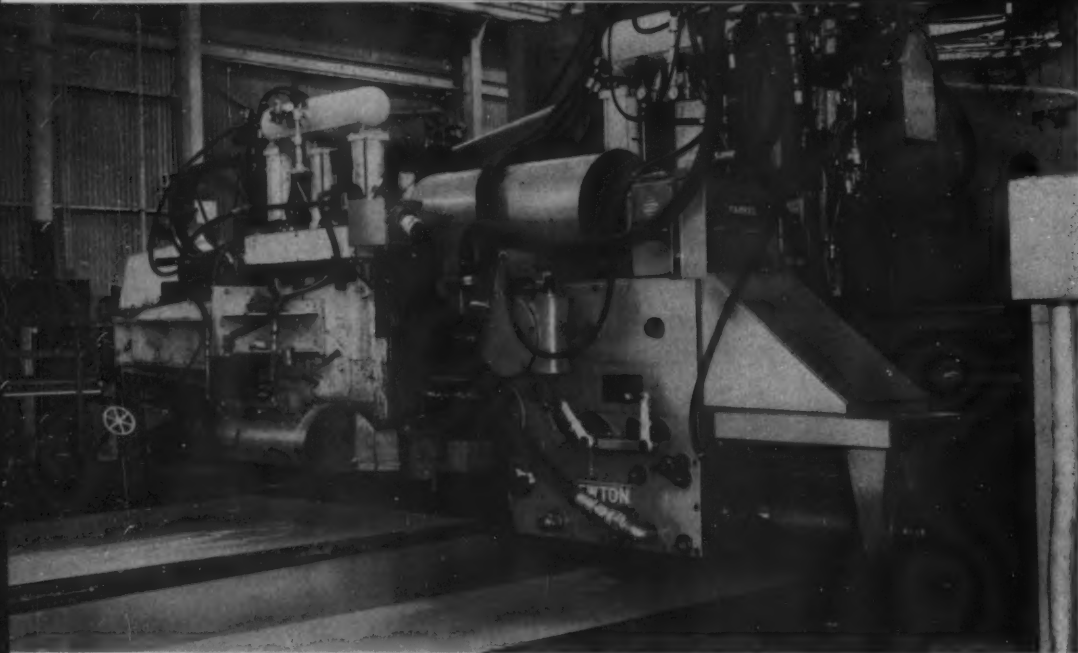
Huge machine equipped with two spindle heads for horizontal, vertical, and angular milling. The left-hand head will produce all types of configurations on a large part under the control of a cam-bar and roller.
